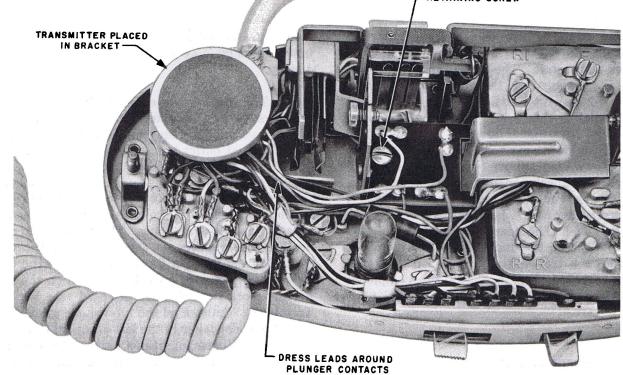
Final Assembly of 664A Transmitter Unit in 711B Telephone Set
